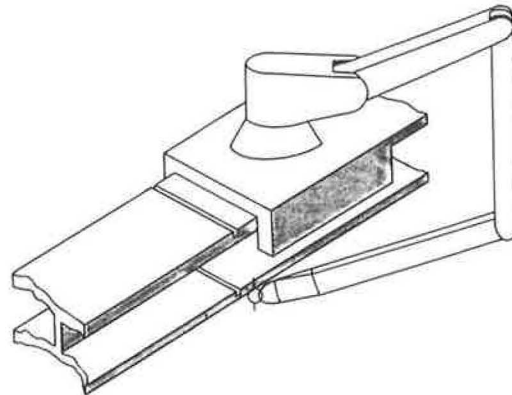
Robot setup for welding steel girders (10).
